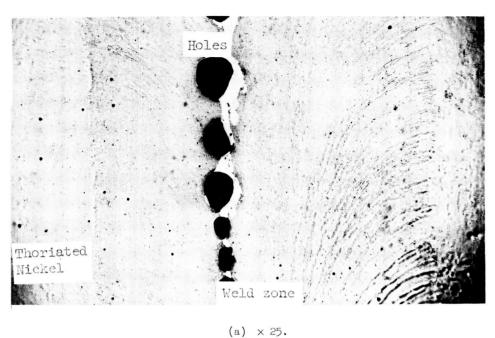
Photomicrograph of tungsten-inert-gas butt-welded thoriated-nickel sheet using pure-nickel filler rod.
